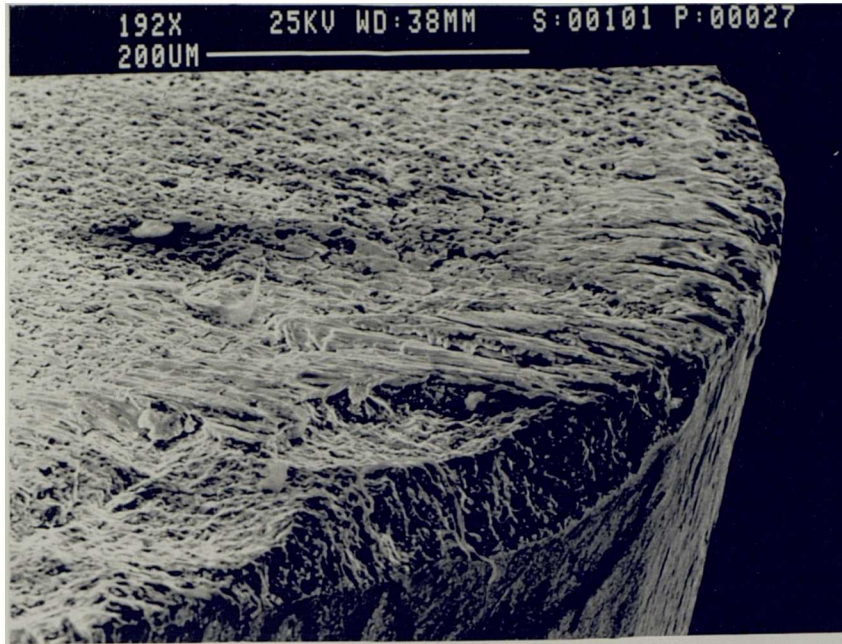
Formation of protective layer on the rake face of PCD insert machining at speed of 150 m/min.
